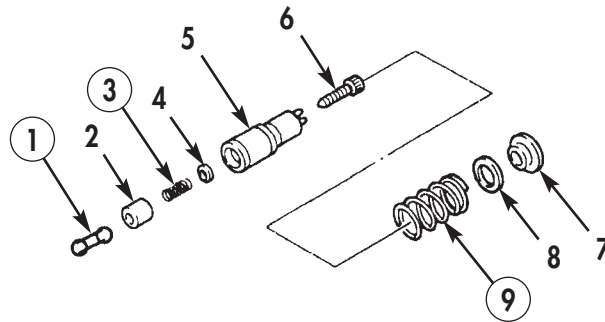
Fuel Pump Governor Spring Disassembly, Cleaning and Inspection, and Assembly.
